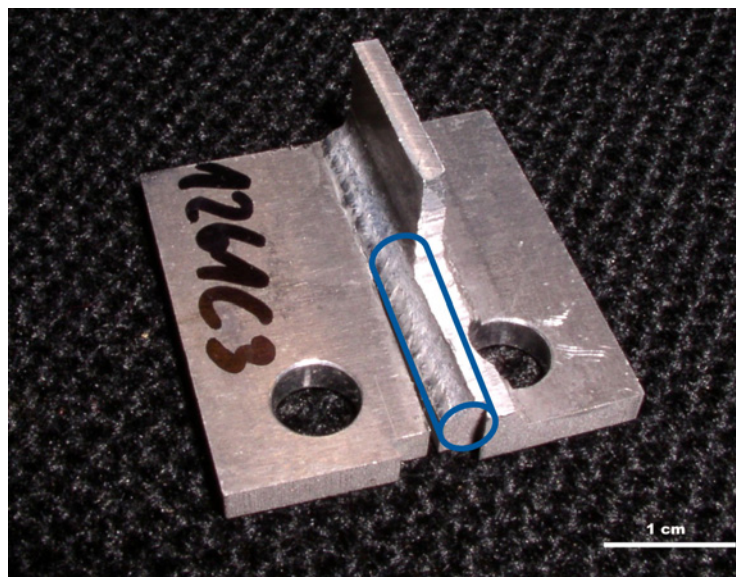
A laser welded aluminium alloy T-joint for the microtomography study. The skin consists of AA2139 T3 and the clip of AA6013 T6.
